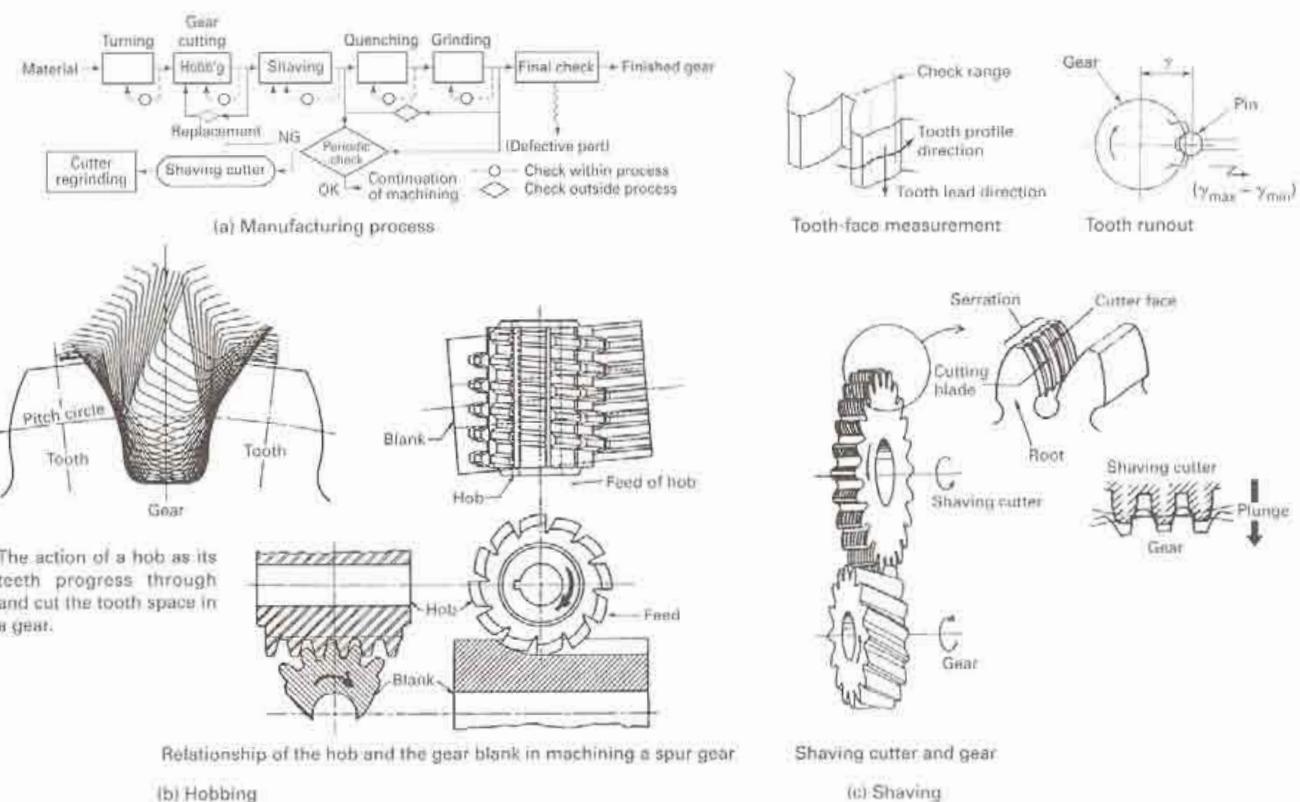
The typical gear-making process (for very accurate gears) involves both hobbing and shaving followed by grinding after heat treating.
